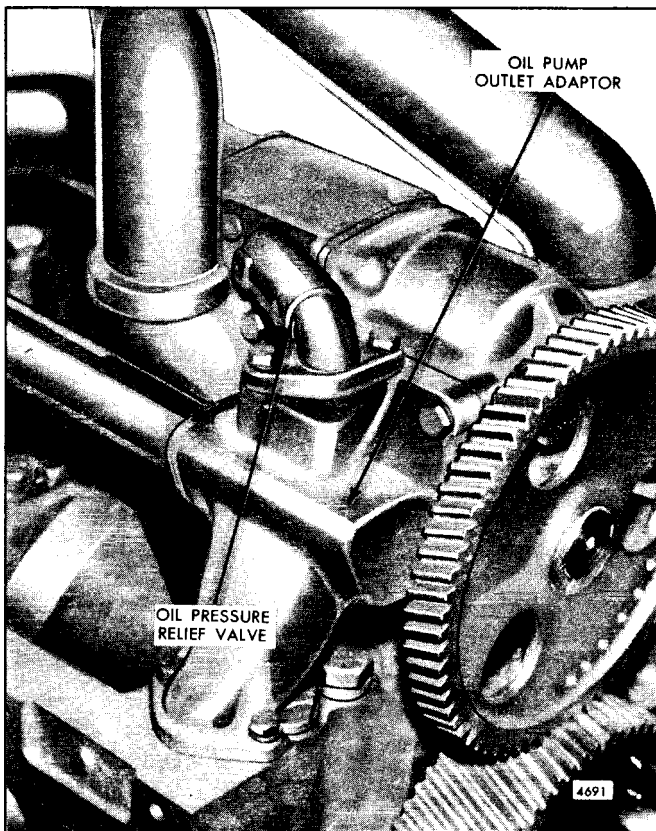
Oil Pump Outlet Adaptor (12V and 16V Engines)
